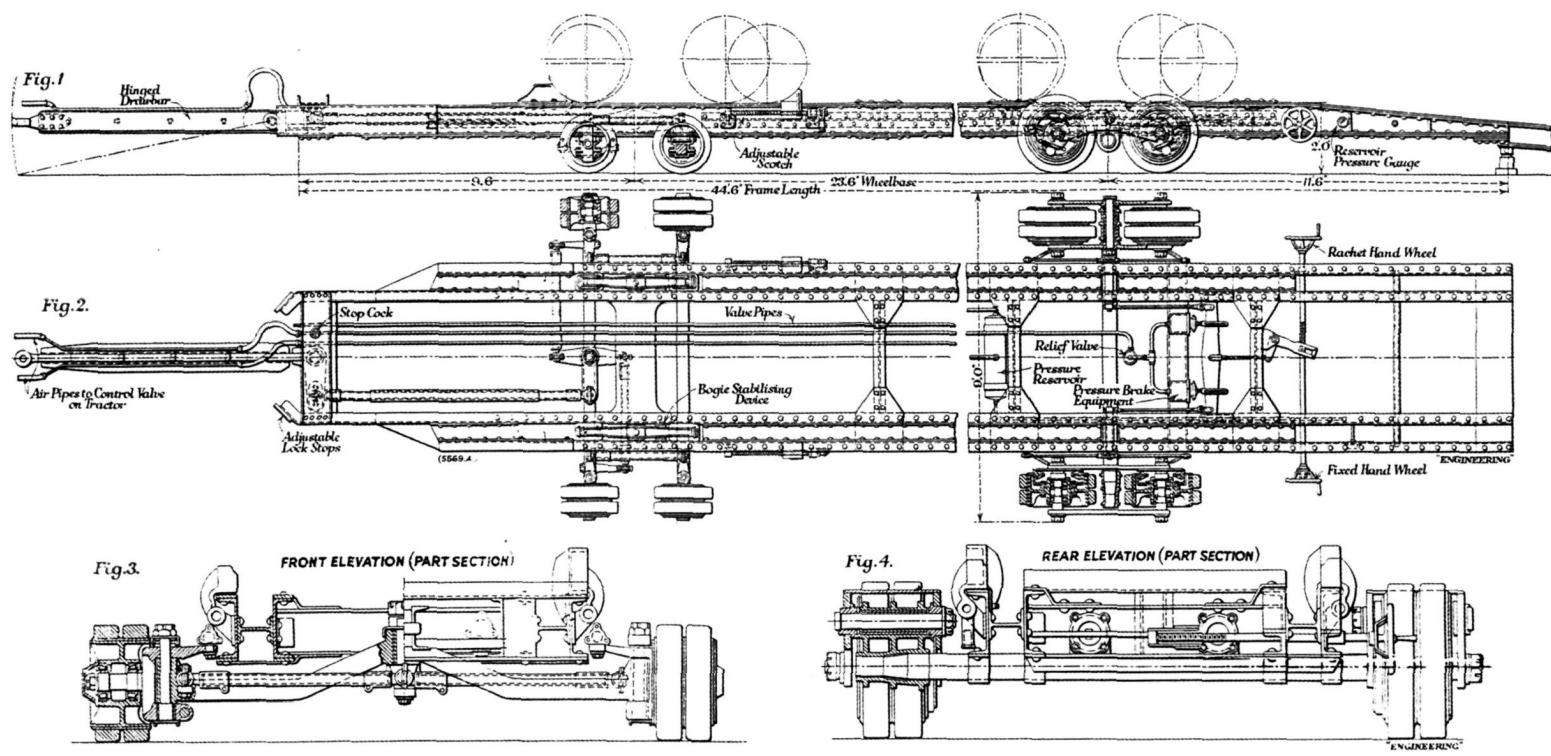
The rear end arrangement is shown to the right of Figs. 1 and 2, and in fig. 4. The eight front tyres are 26 in. by 5 in. by 16 in., and those at the rear, 26 in. by 5 in. by 20 in. All are solid and of Dunlop manufacture.
